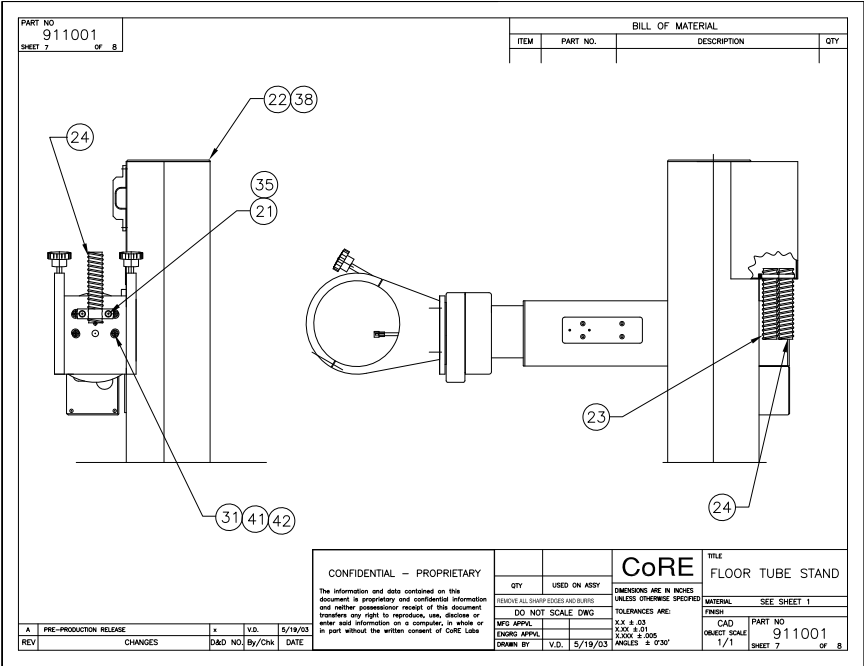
More views of transverse arm showing cable management as well as platform leveling screws (kidneys behind tube).
